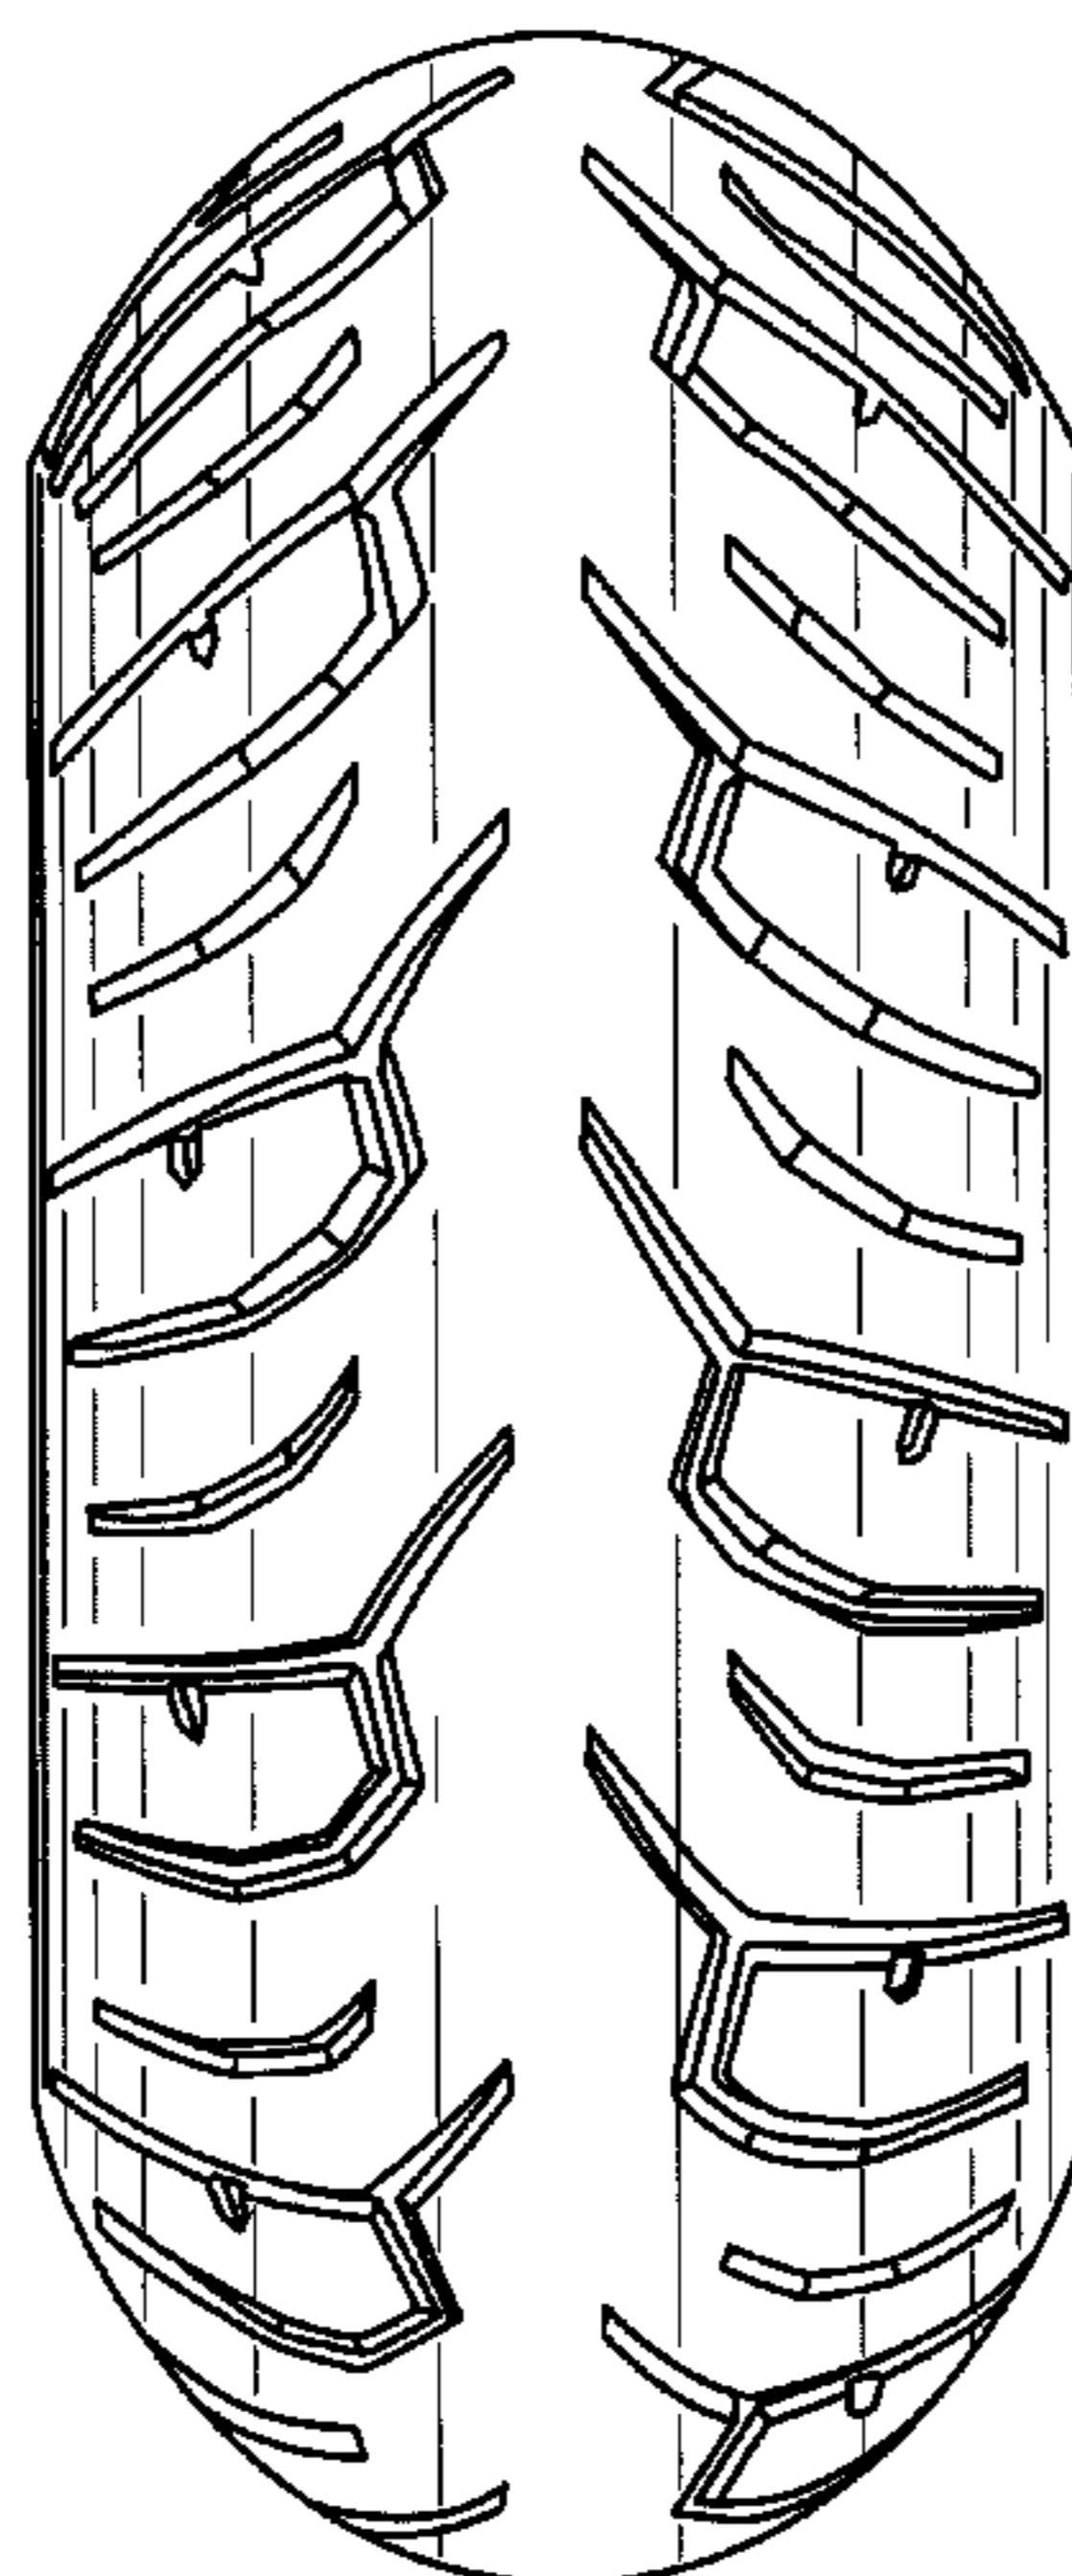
is a front view of my new design, the top, and bottom views being identical thereto;
